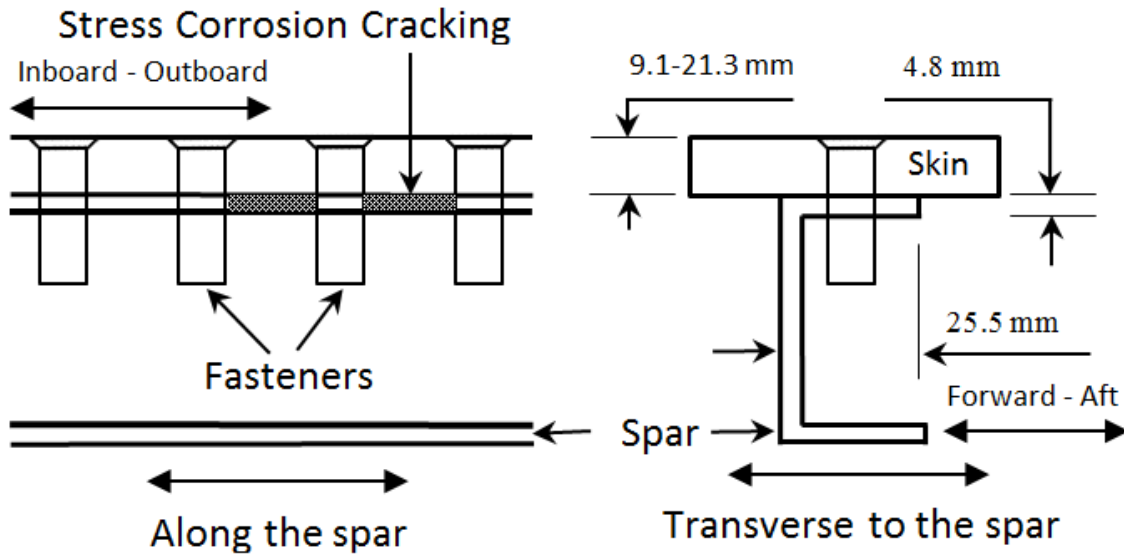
Typical inner wing spar lower cap fastener cross-section and side view.
